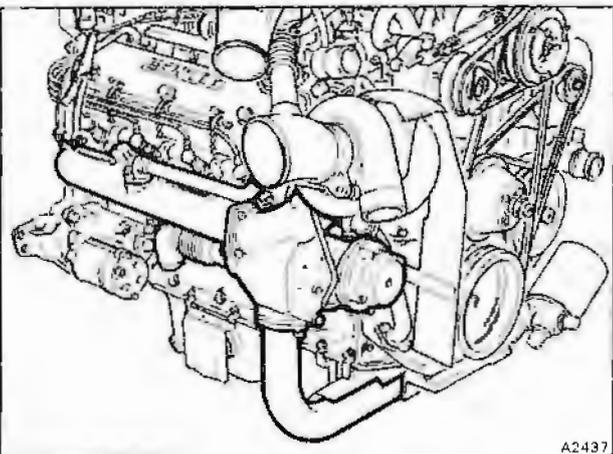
Split type exhaust manifold – 'A' bank
